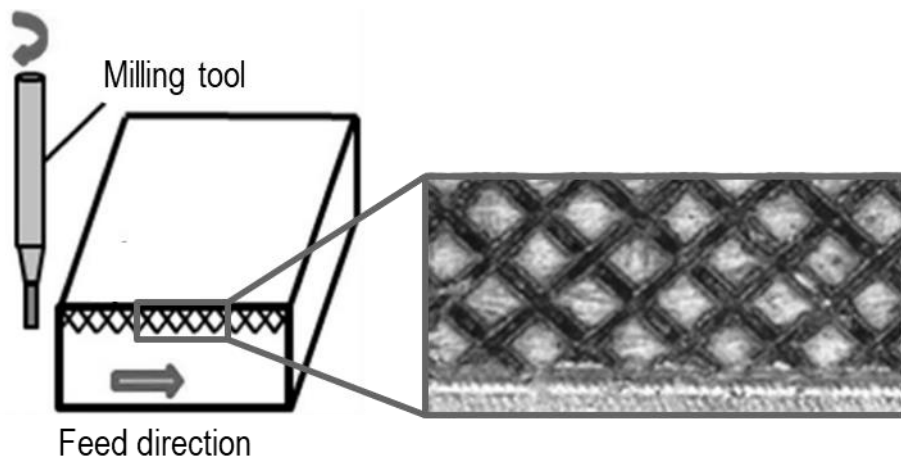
Structuring the workpiece before the micro-milling of austenitic stainless steel X5CrNi18-10 [144].
